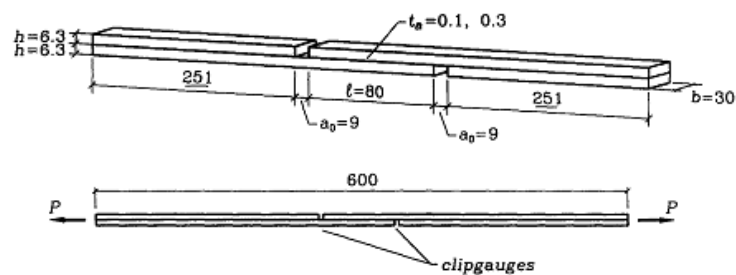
Supported single lap joint configuration (dimensions in mm) [193].
